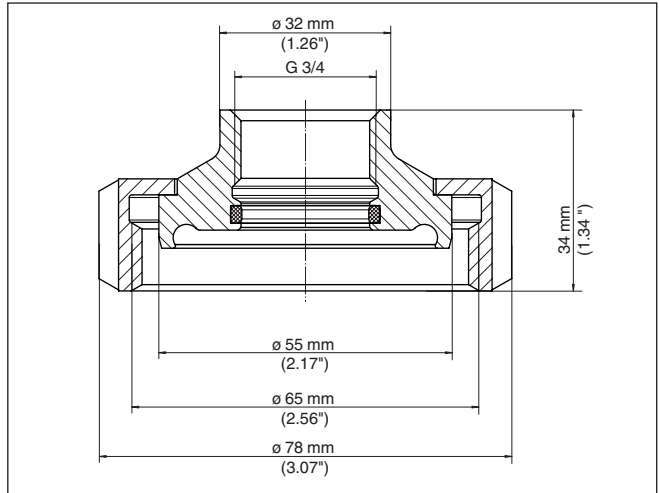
Dimensions of threaded adapter G $\frac{3}{4}$ (DIN 3852-X) on slotted nut DN 40 (DIN 11864-1) PN 16
